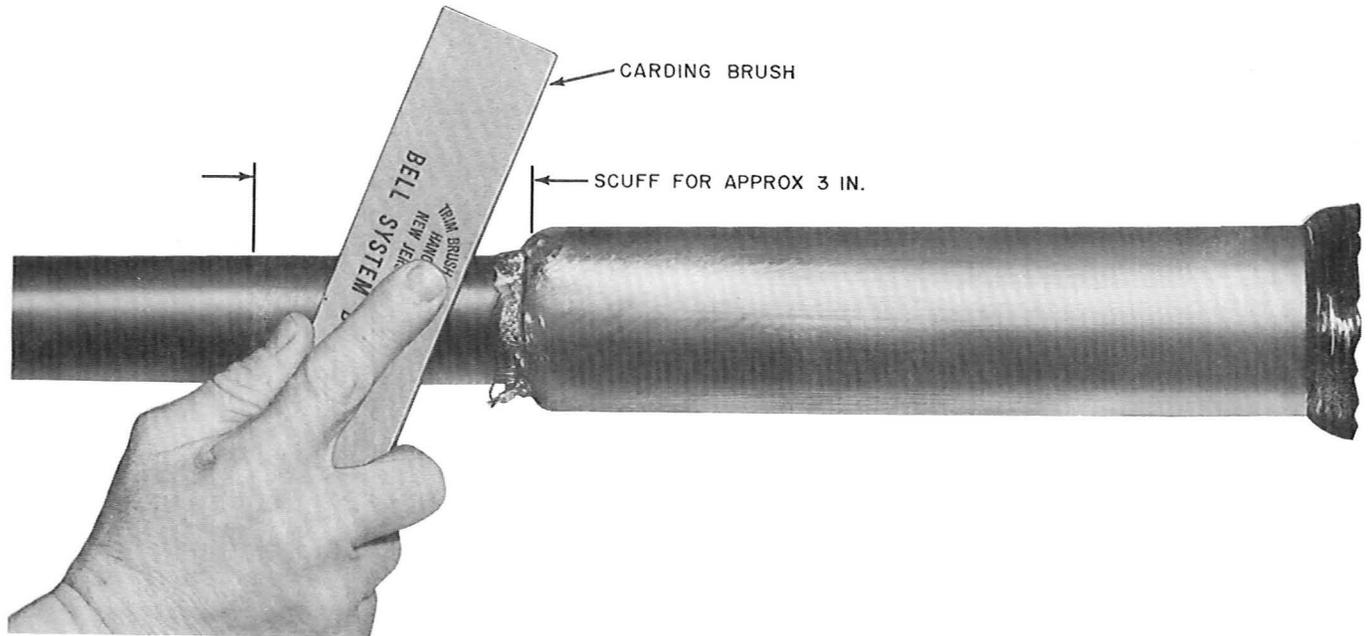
Scuffing Polyethylene Sheath with Carding Brush
